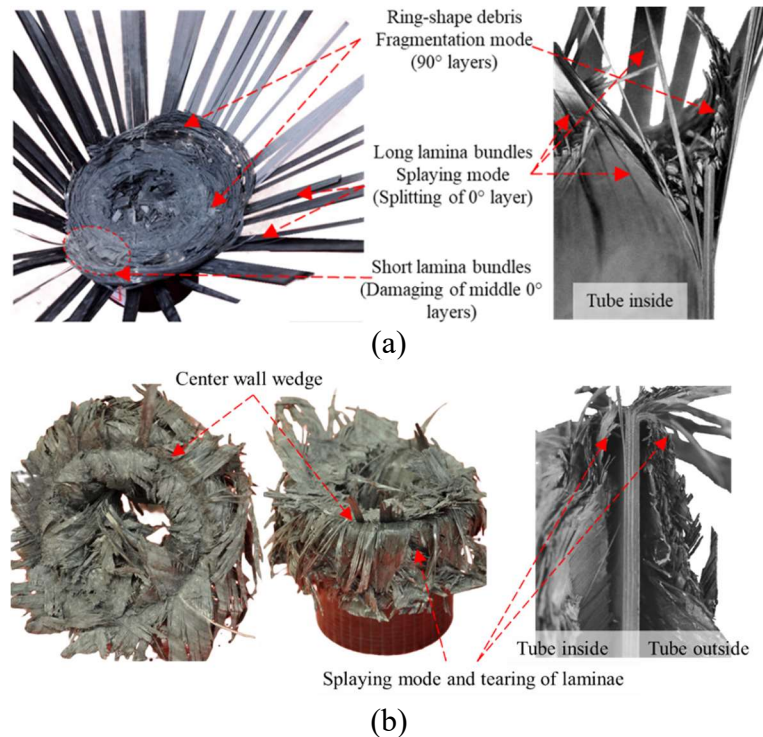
Crushed morphology of CFRP tubes after axial impact; (a) Cross-ply tube [0°/(90°)₂/0°]ₛ; (b) Angle-ply tube [±45°/0°/±45°/0°/±45°/0°/±45°].
